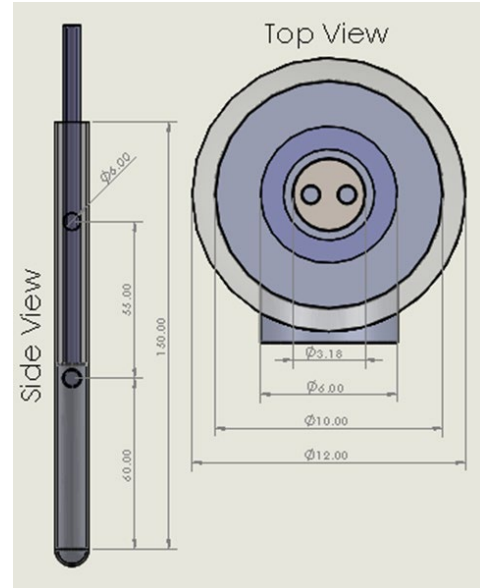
Schematic of the mold assembly with detailed dimensions (mm).
